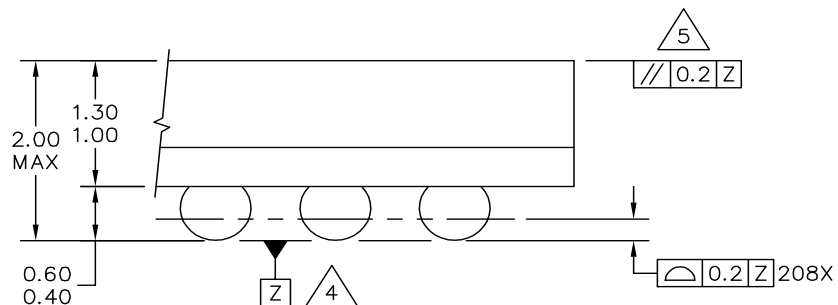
208 MAPBGA package mechanical drawing (part 1)
